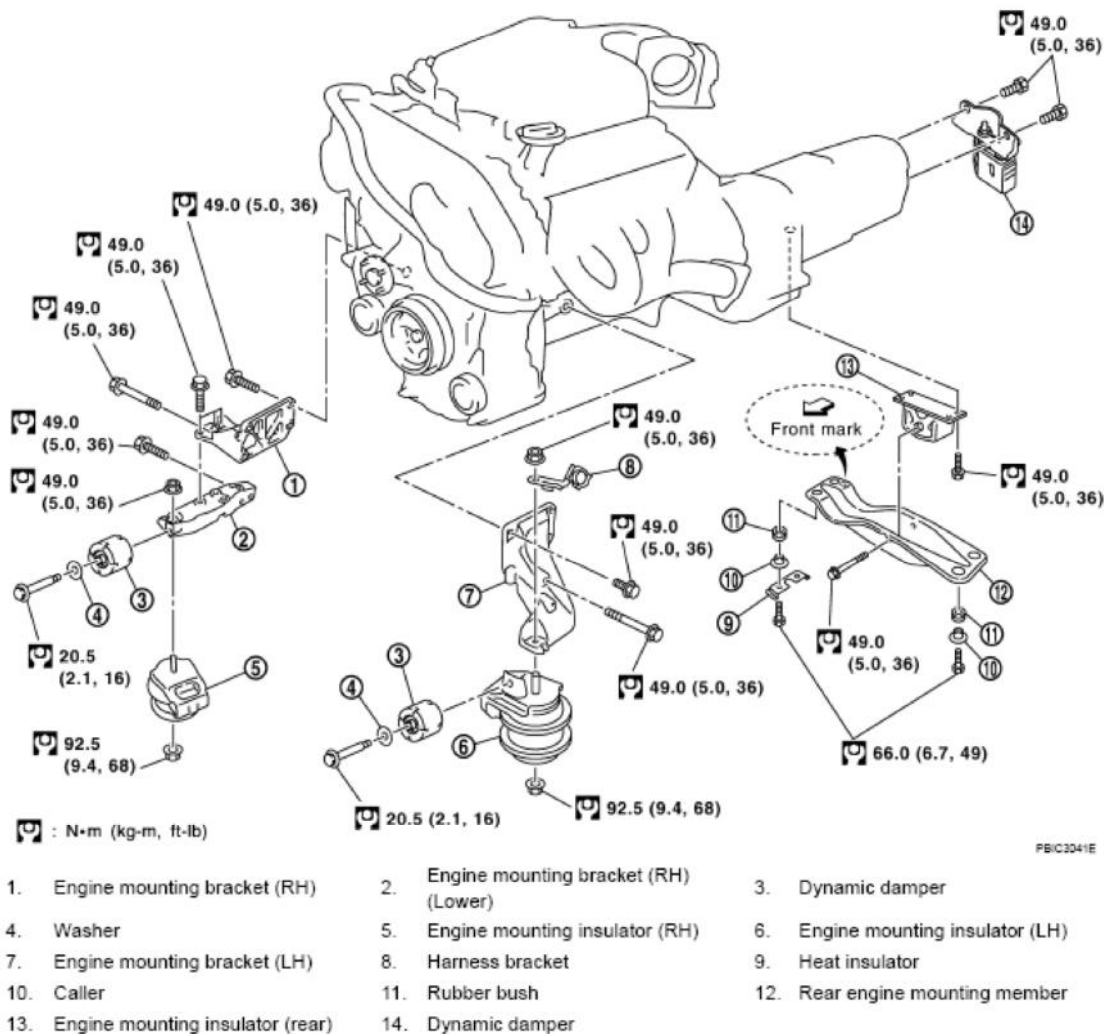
Identifying Engine Assembly Components With Torque Specifications (AWD Models)
